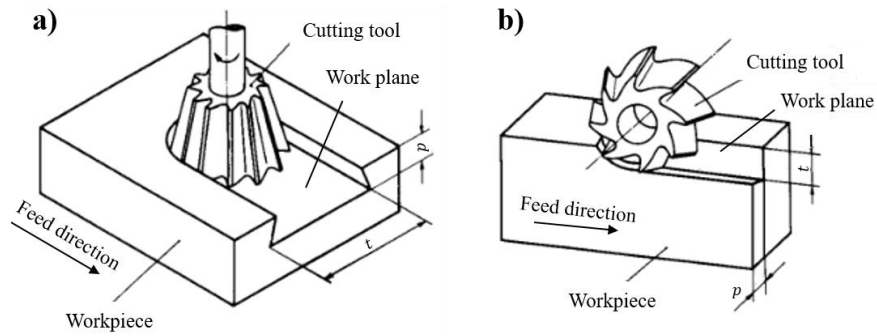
Axial and radial depths of cut in: a) Frontal milling; b) Tangential milling [15]
